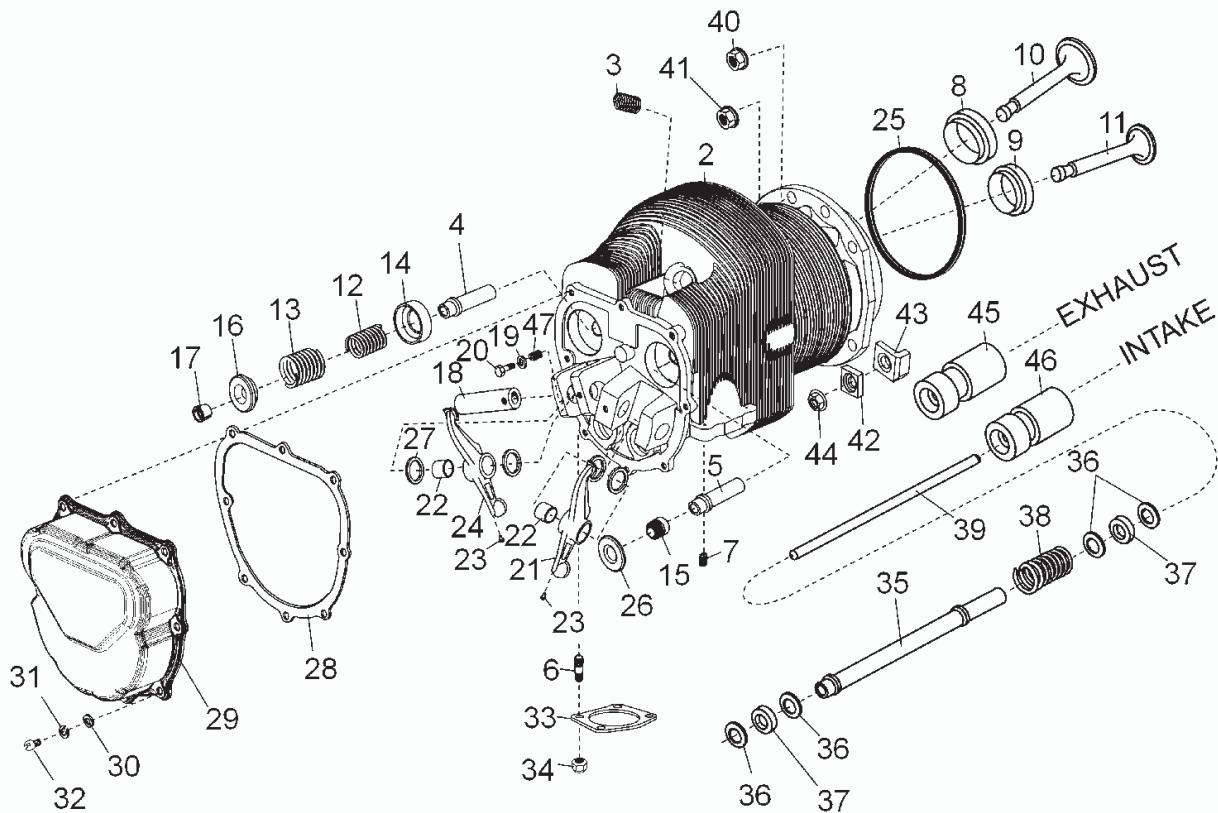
IO-550-A, B & C Engine Cylinder A B C
